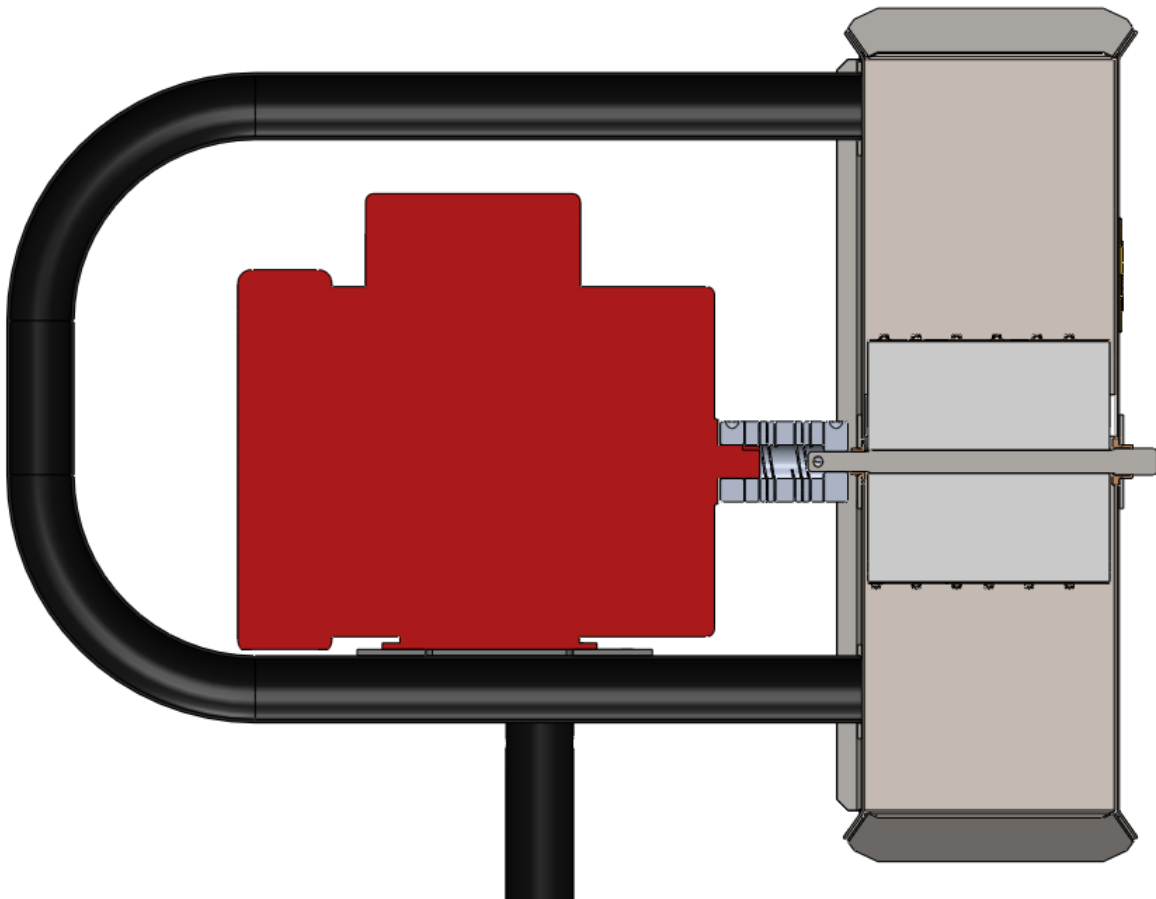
FIGURE: Section View of Production Prototype detailing coupling, shaft, head, and bushings
